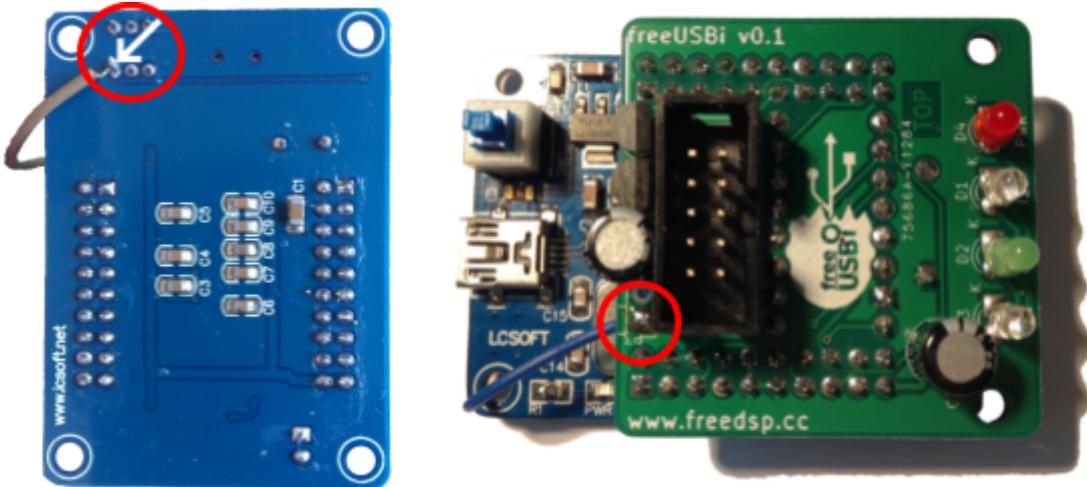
P3 is directly connected with +5V from the bottom of the CY7C68013A MINI BOARD using an additional cable.
